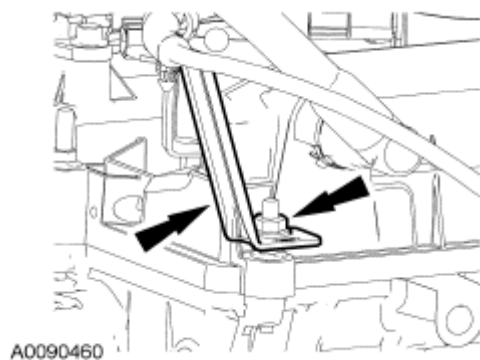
Locating Accelerator Control Cable Bracket Nut (2 Of 2)
